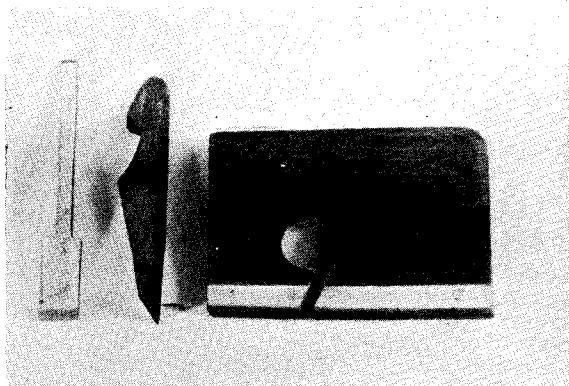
Another type of small plane, made of beech faced with box-wood.
